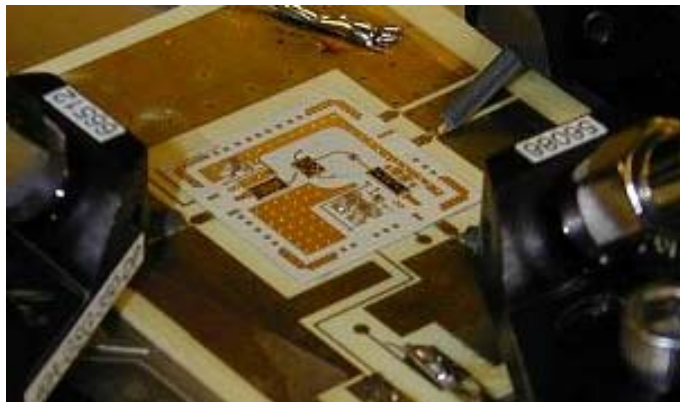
Thin film LCP surface-mount receiver package module mounted on the PCB test board
